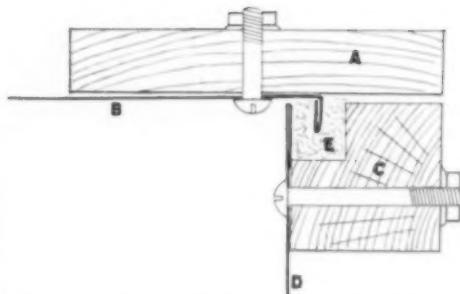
DETAIL SECTION OF THE JUNCTION OF THE LID AND THE TOP OF THE BOX. THIS SHOWS HOW A MOTH-PROOF CRACK MAY BE MADE. TO THE WOODEN LID FRAME (A) IS BOLTED A GALVANIZED IRON LID (B) WHICH HAS A 3/8-IN. FLANGE ON THE OUTER EDGE. THIS FITS INTO A GROOVE (E) WHICH IS MADE BY THE SIDE OF THE BOX (D) AND A RABITED GROOVE IN THE BOX FRAME (C). THE GROOVE (E) IS FILLED WITH COTTON FELT OR COTTON WADDING WHICH WILL PREVENT THE PASSAGE OF MOTHS. (SCALE 1/2 NATURAL SIZE.)
